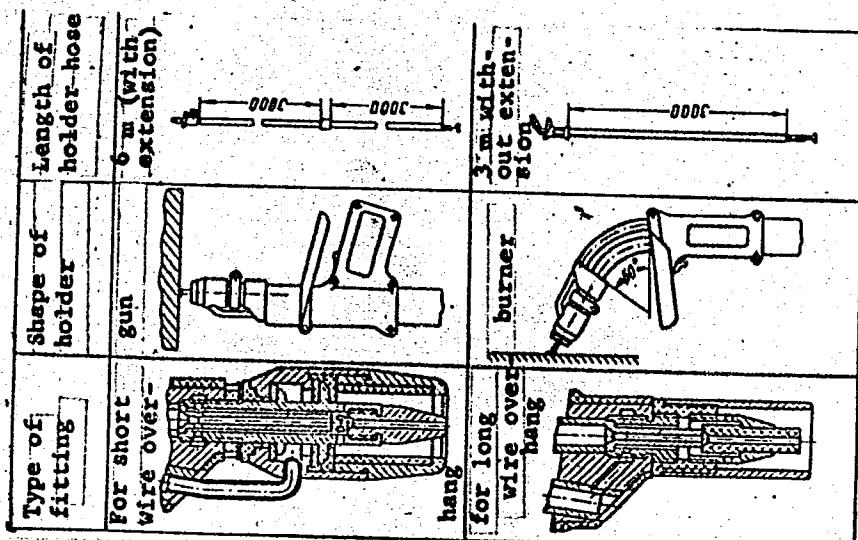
,a. Variants of accessories for TsNIITMASH-designed standardized semiautomatic welding machines
